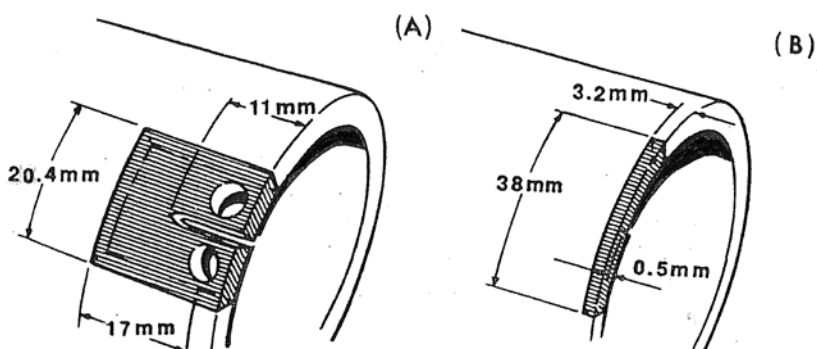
Schematic diagrams of CCT specimen (A) and CB specimen (B), dimensions in mm.
